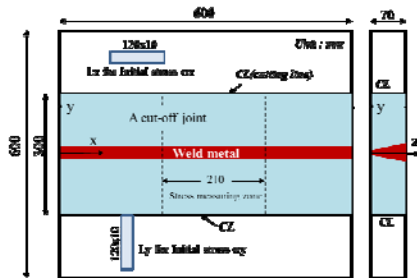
Dimension of the original welded joint, a cut-off joint for residual stress measurement and specimens (Lx, Ly) for initial stress measurement
